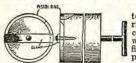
A handy device for testing and fitting the piston rings in a cylinder. This device consists of a round block of wood with a handle on one end fitting cylinder snugly. The piston ring is placed on the other end and is held by a block lighter and worked head and forth
